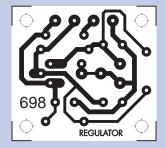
this is the full-size etching pattern for the PC board. Check your board for defects before mounting any of the parts.
